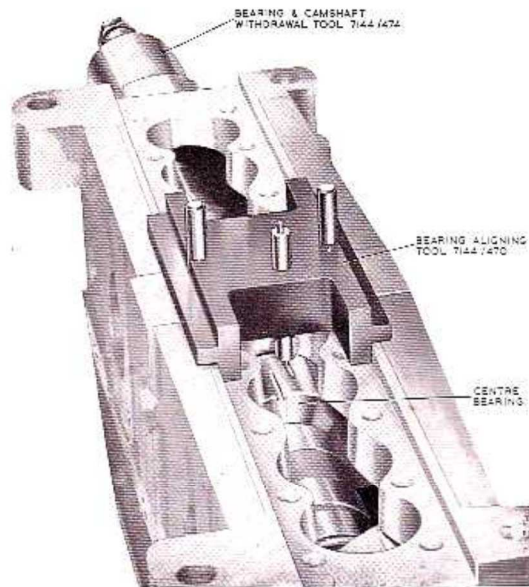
FITTING ALUMINIUM TIN ALLOY TYPE CENTRE BEARING
